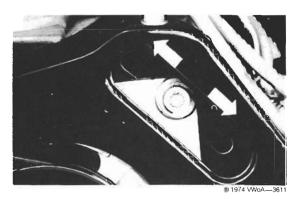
Alternator belt adjustment. To remove the belt, move the pulley as indicated by the left arrow.
